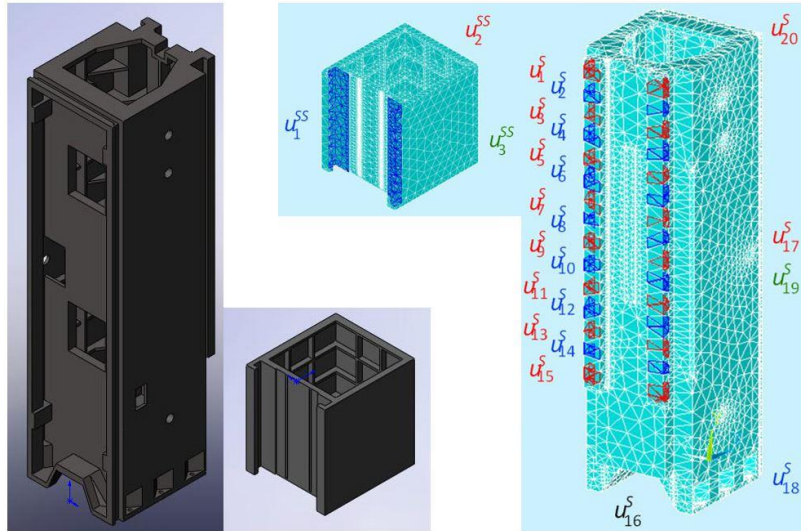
CAD- and FE-model of machine tool column and spindle slide [15]
